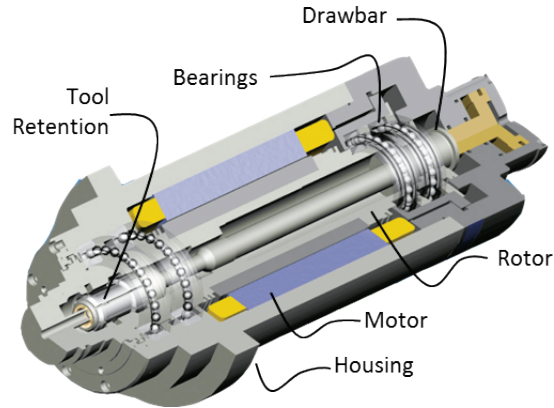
Cross section of high-speed machining spindle offered by Primero Machine Tools Corp [20].
